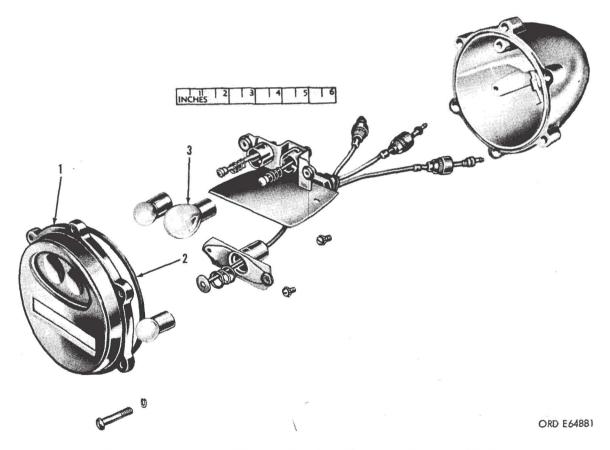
Left service, blackout tail, and stoplight assembly - exploded view
